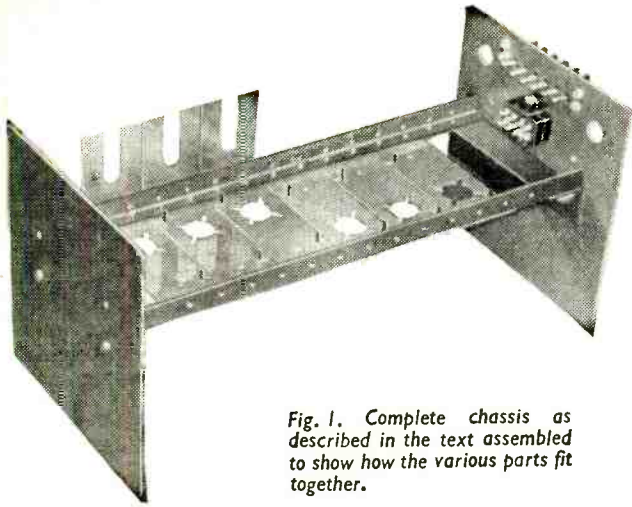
Complete chassis as described in the text assembled to show how the various parts fit together.
